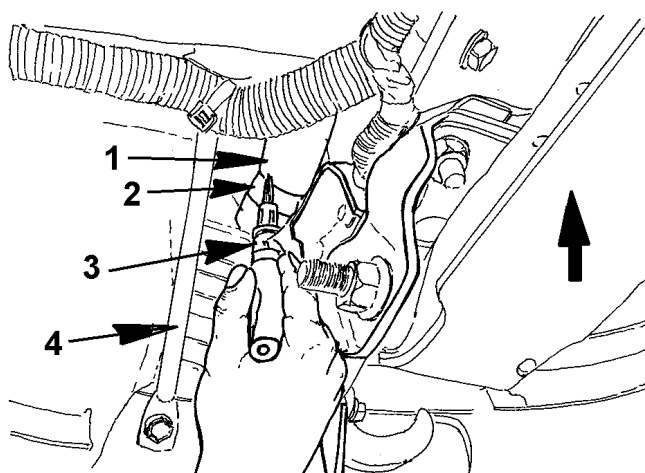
Passenger Side Lower Cooling System Hose And Clamp
